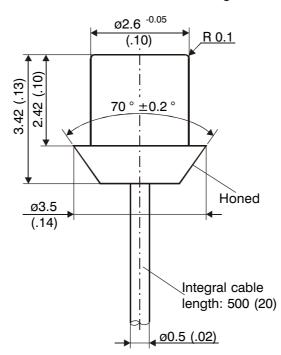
Sensor Dimensions LS04 with integral cable
